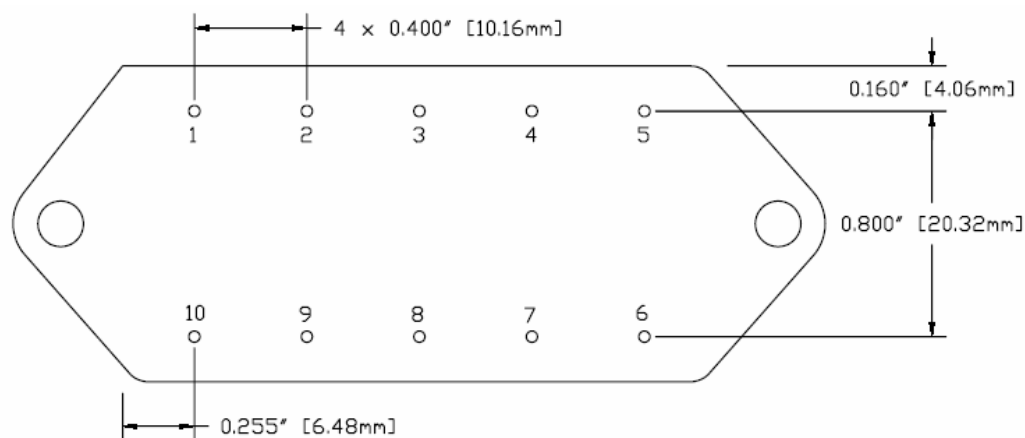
Non-Flanged, Seam Seal Package and Pinout
